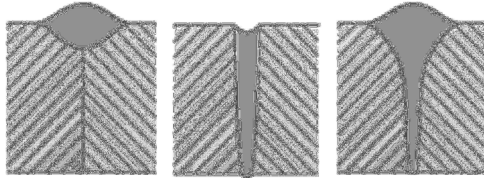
15 Difference between Gas Metal Arc Welding (GMAW), Laser and Hybrid Laser Welding welds(25)
